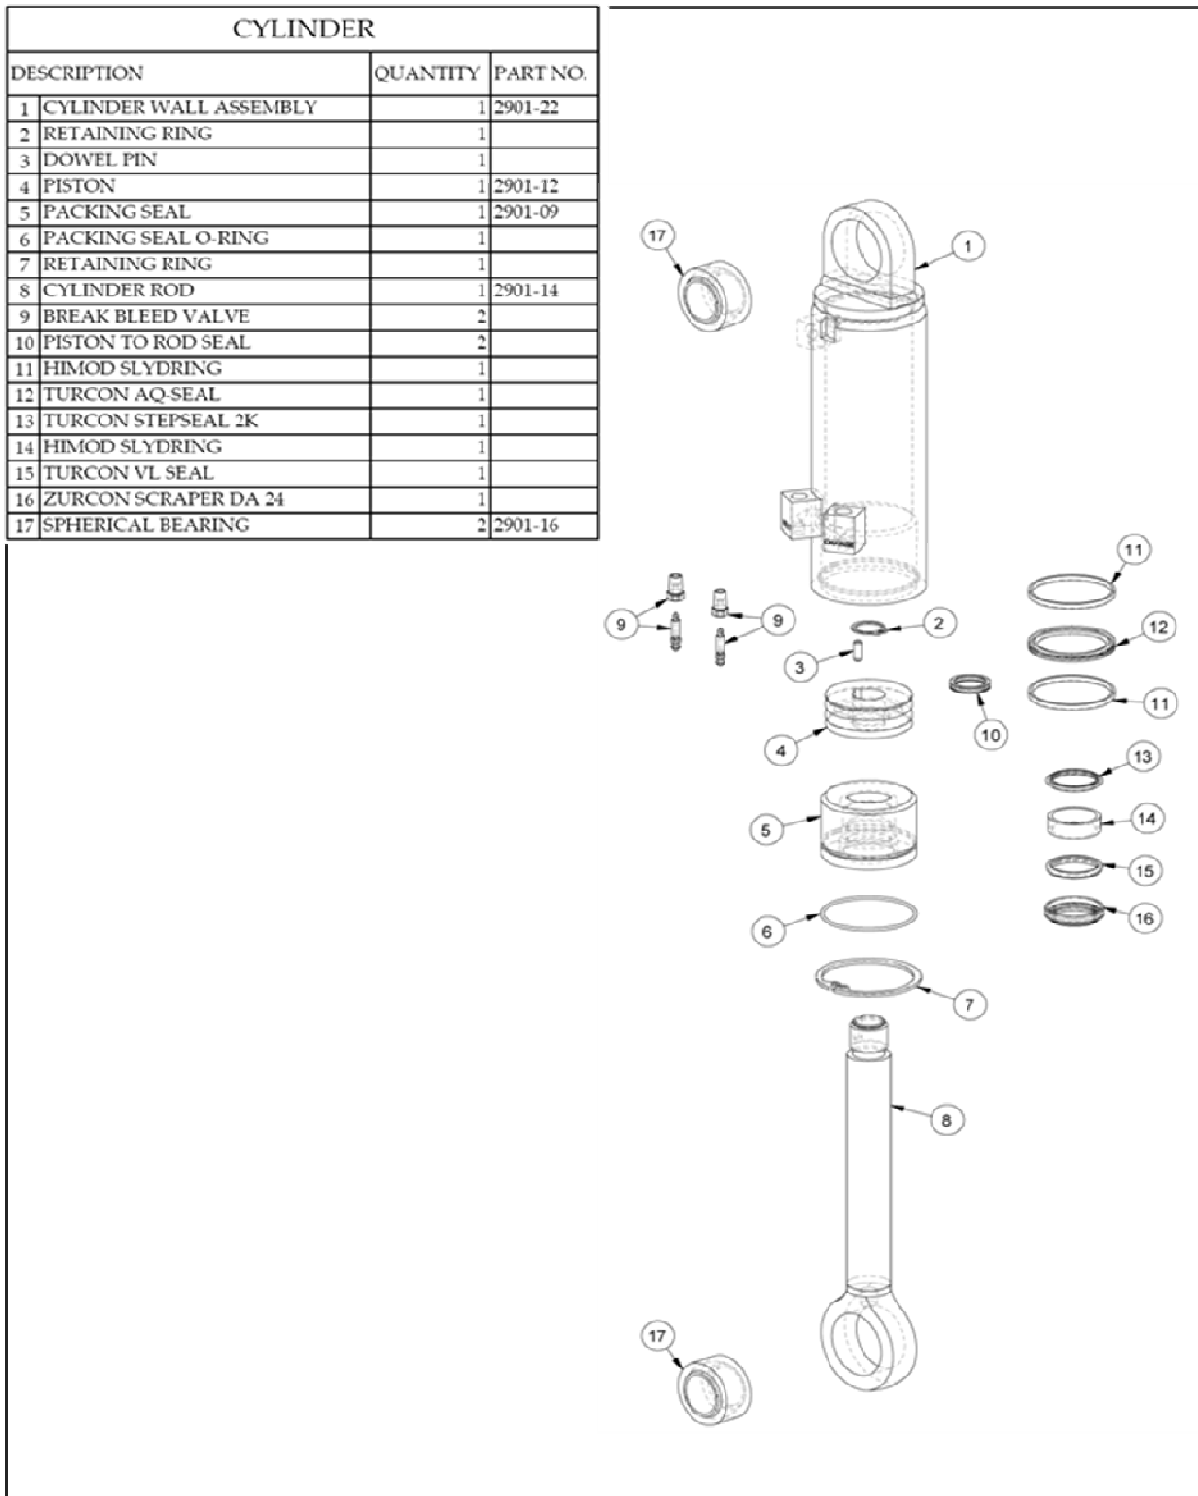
Cylinder's drawing with parts description (Courtesy of Amsted Rail).
